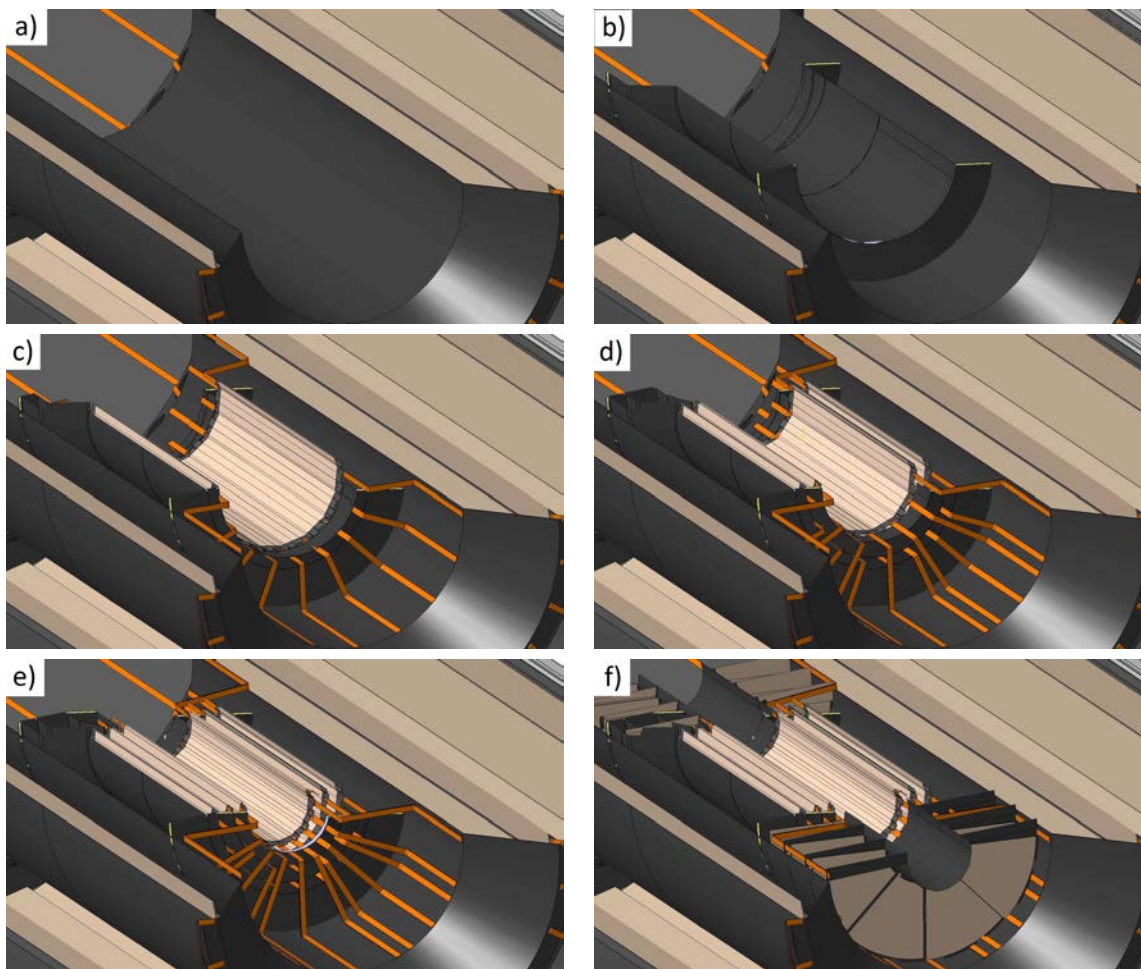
Sub-assembly of the vertex detector and inner tracking layers: a) detailed view of the Inner Support Structure in its final location; b) Air-Flow Guiding Cylinder and outermost VXBD layer supports once assembled; c) detailed view of the outermost VXBD layer in place with its services; d) middle VXBD layer in place with its services; e) detailed view of the innermost VXBD layer in place with its services completing the assembly of the vertex detector barrel; f) VXEC petals assembled inside the inner region (their services follow the same path as the ones of the VXBD).
